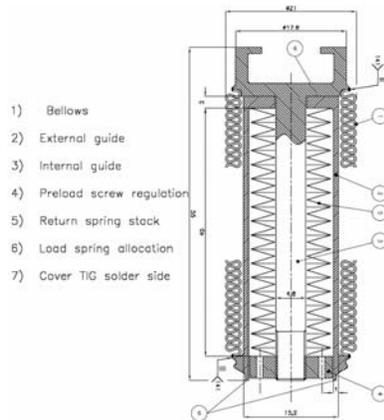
Hydraulic bellows and relative return spring assembly in compressed position
